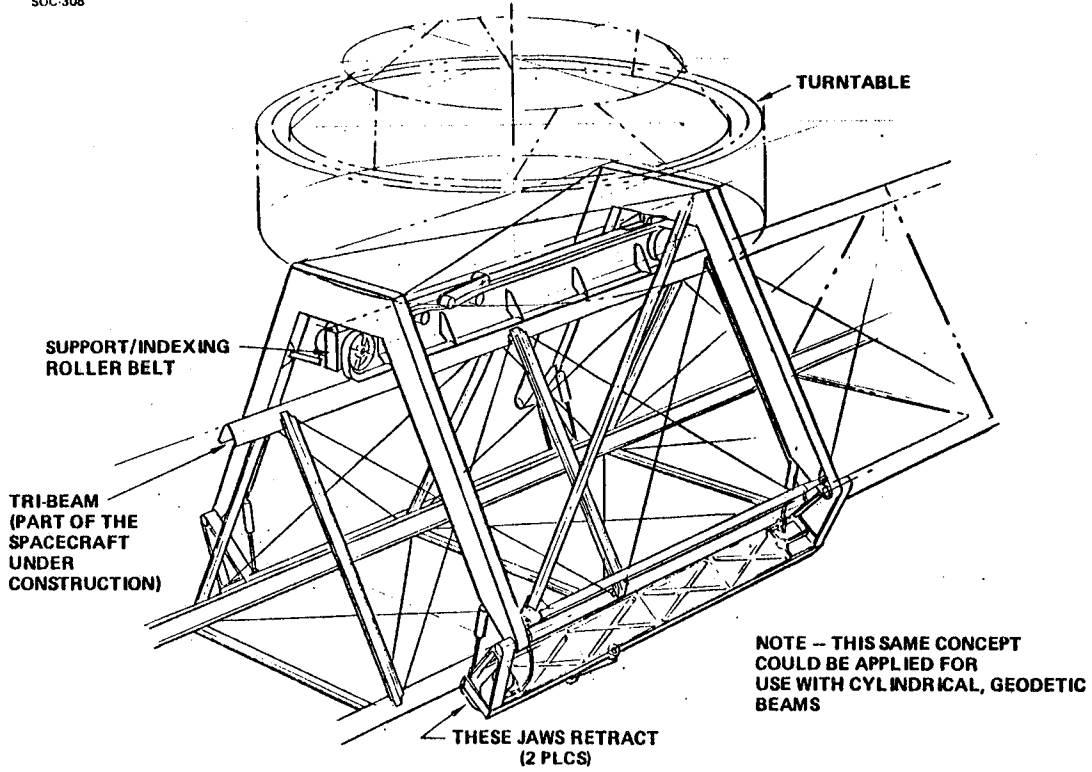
Figure D. Construction Fixture Accessory—Tri-Beam Support/Indexing Module
